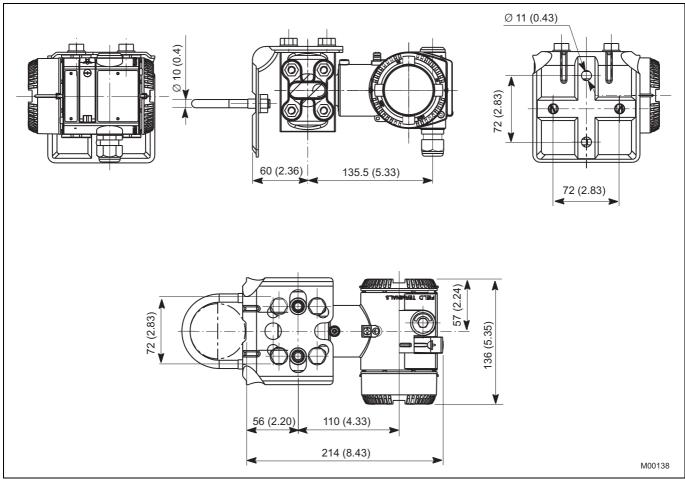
Dimensions in mm (inches), deviations in the drawing are possible
